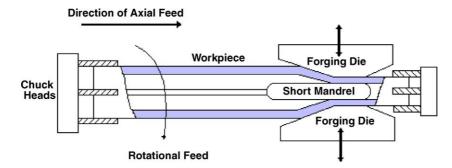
Schematic view of the mandrel forging process used for producing tubes.
